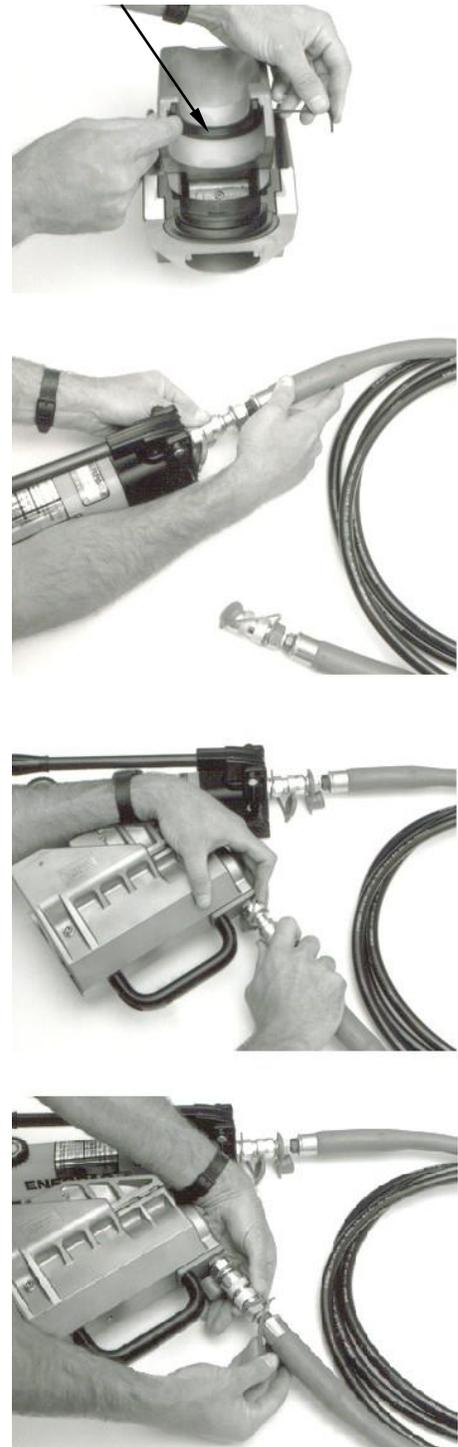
Installing Jaw Insert and Connecting Tool to Pump
